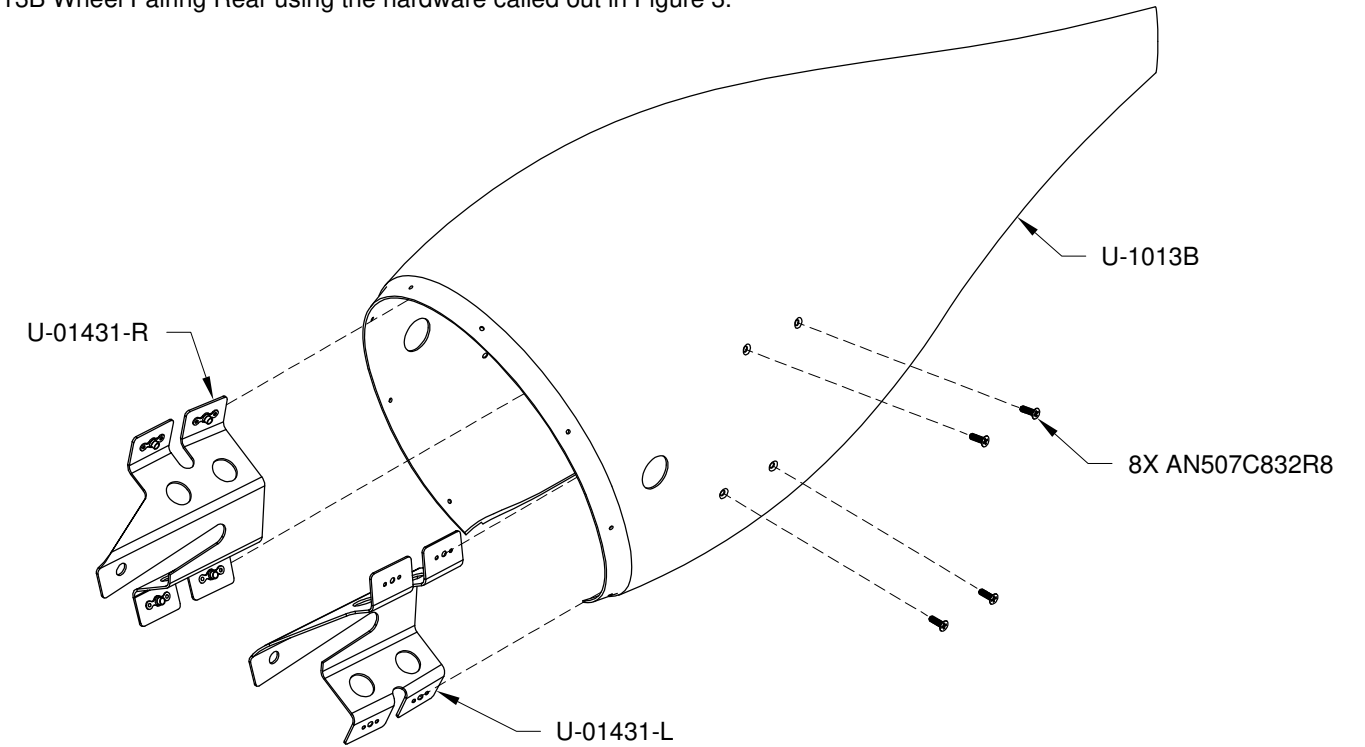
ATTACHING NOSE WHEEL - FAIRING BRACKETS
